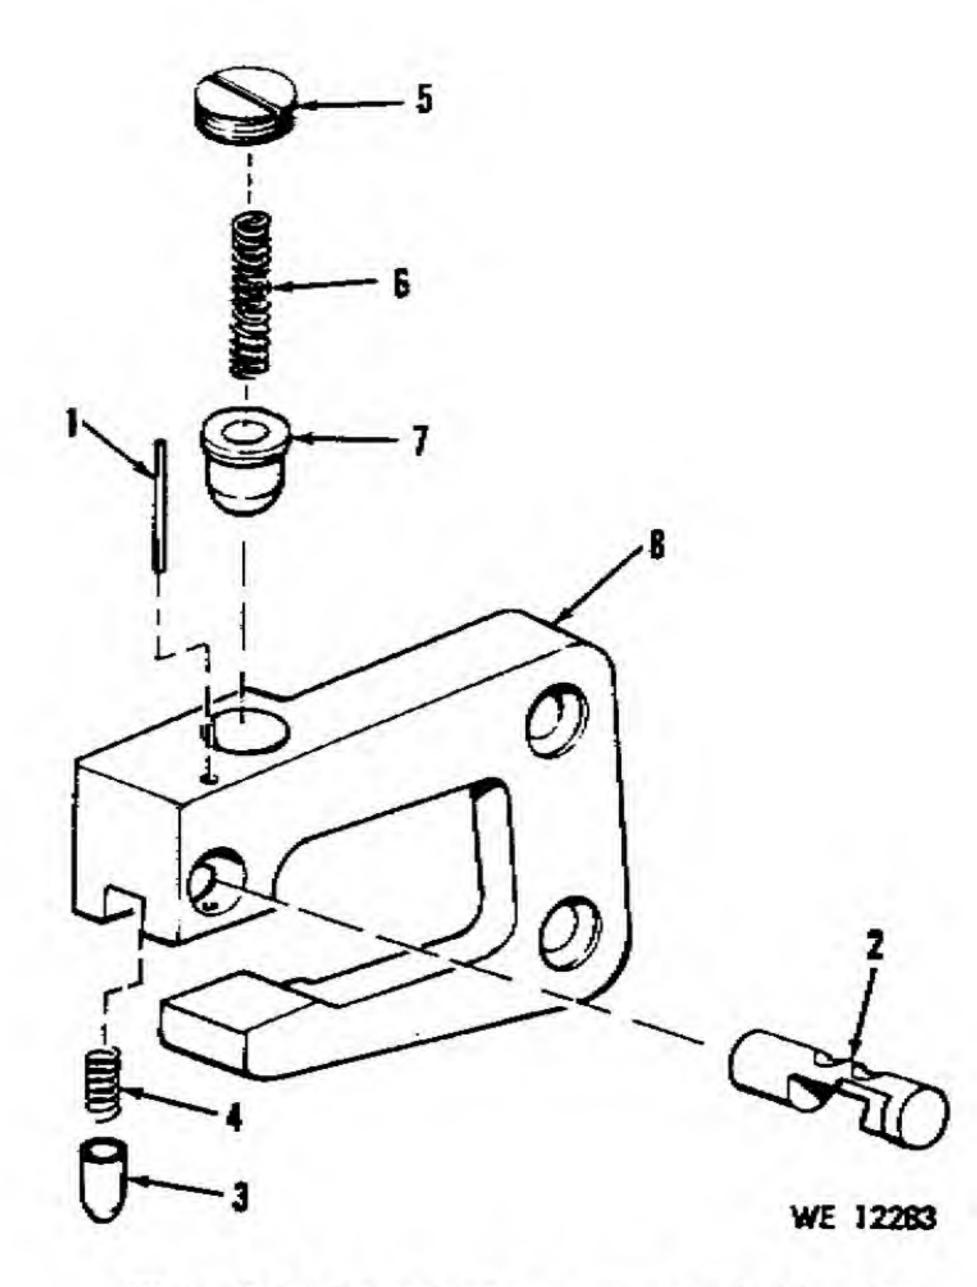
Retracting bar group for Caliber 30 Machine Gun, M37 only—exploded view.
